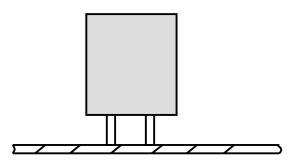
Crystal Oscillator Mounted on Circuit Board, Typical Mounting Method
